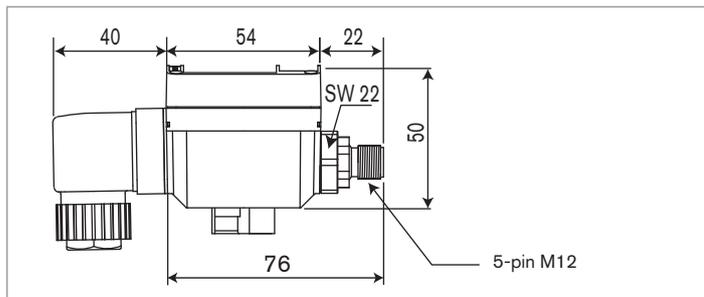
Dimensions [mm] of the SE32 electronic module with a 5-pin M12 fixed connector
